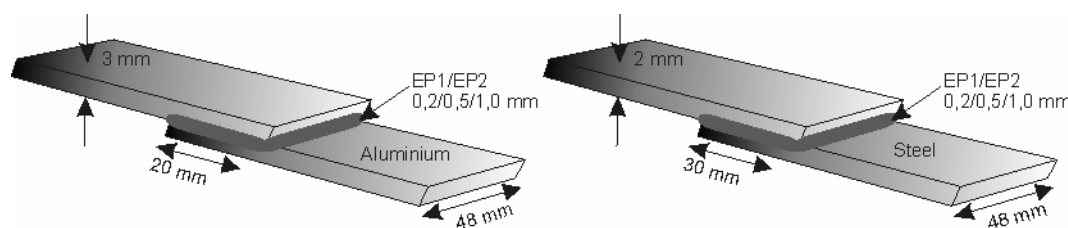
Single lap joint specimen and overlap dimensions for aluminium and steel adherends
